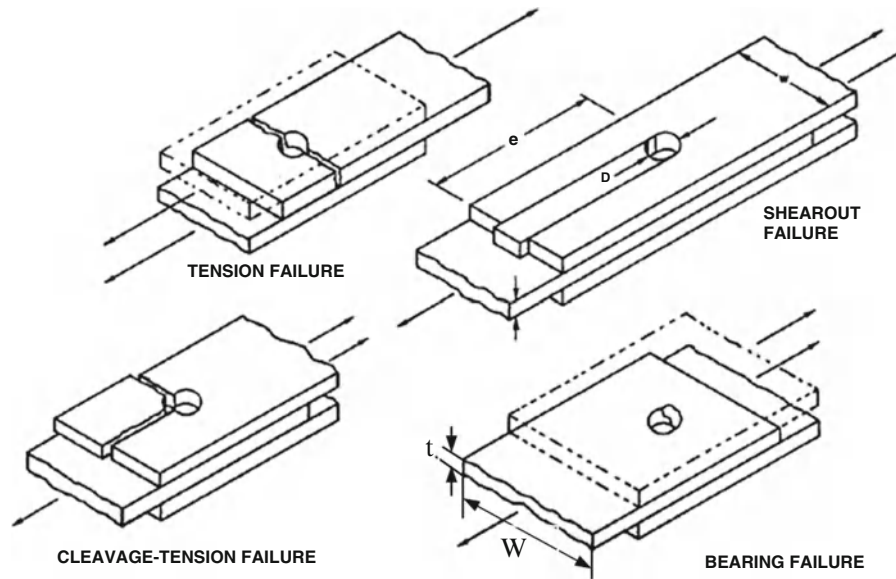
Typical failure modes for bolted joints in composite laminate
